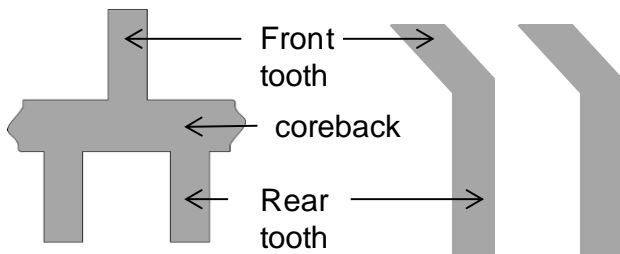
Formed Lamination Machine 2D View (with and without Core-back)
